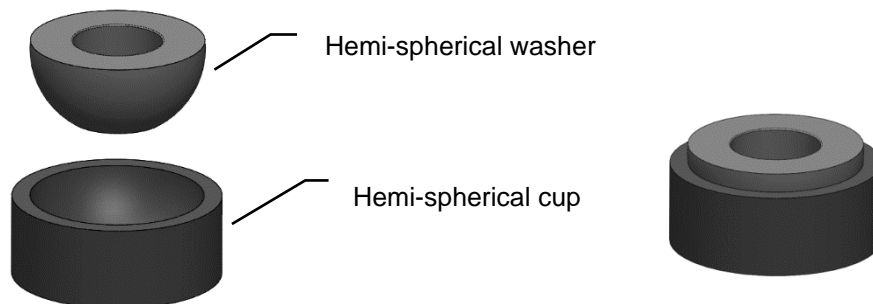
Type 4 - Self-adjusting fixing as parts and assembled example
